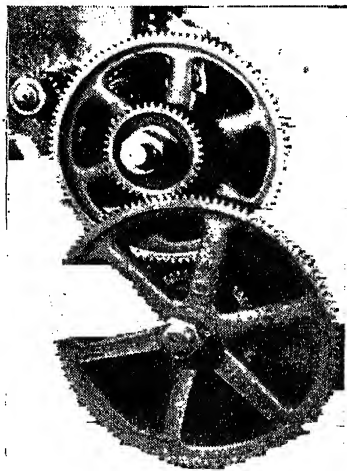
A compound train. The gear behind the lead-screw wheel is used as packing.
